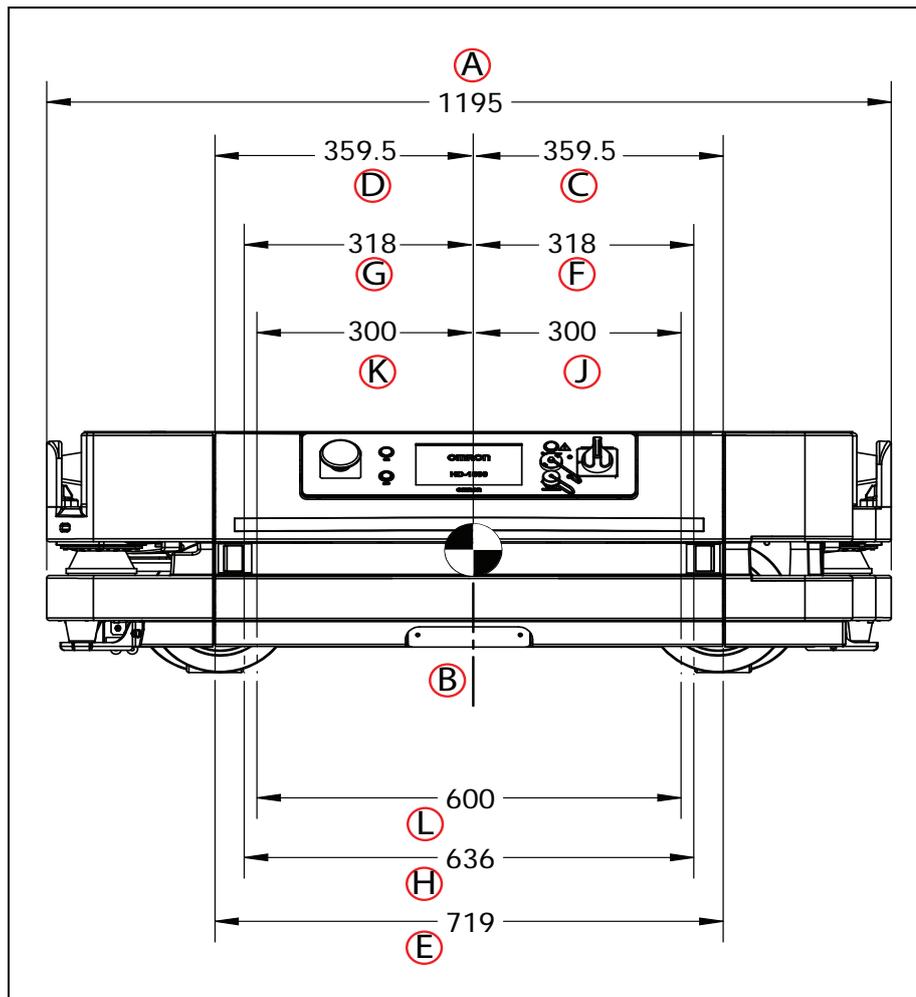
HD-1500 Platform Width Dimensions - Rear View (units are in mm)
